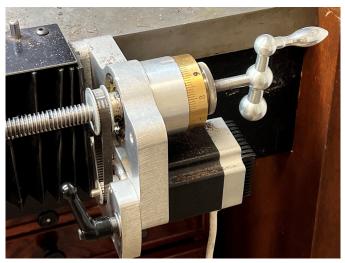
showing a stepper motor with 3:1 gear reduction added to the slide of an OT lathe
